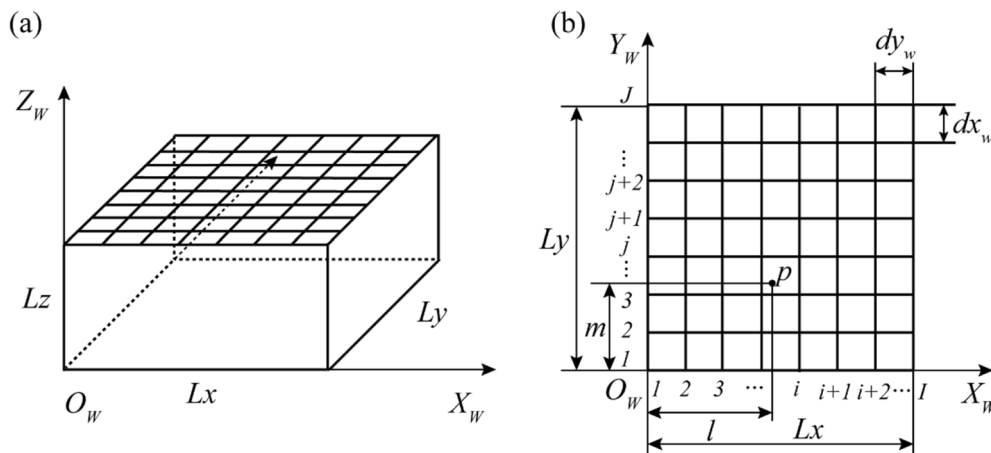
Discretization of the workpiece surface: a Surface of workpiece to be machined, b Schematic of discrete grids
